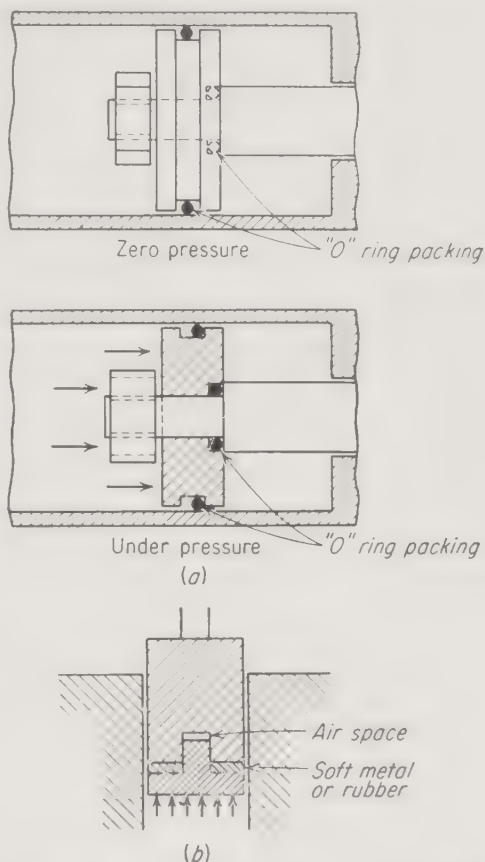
Sealing a piston. (a) O-ring seal. (b) Bridgman packing.
